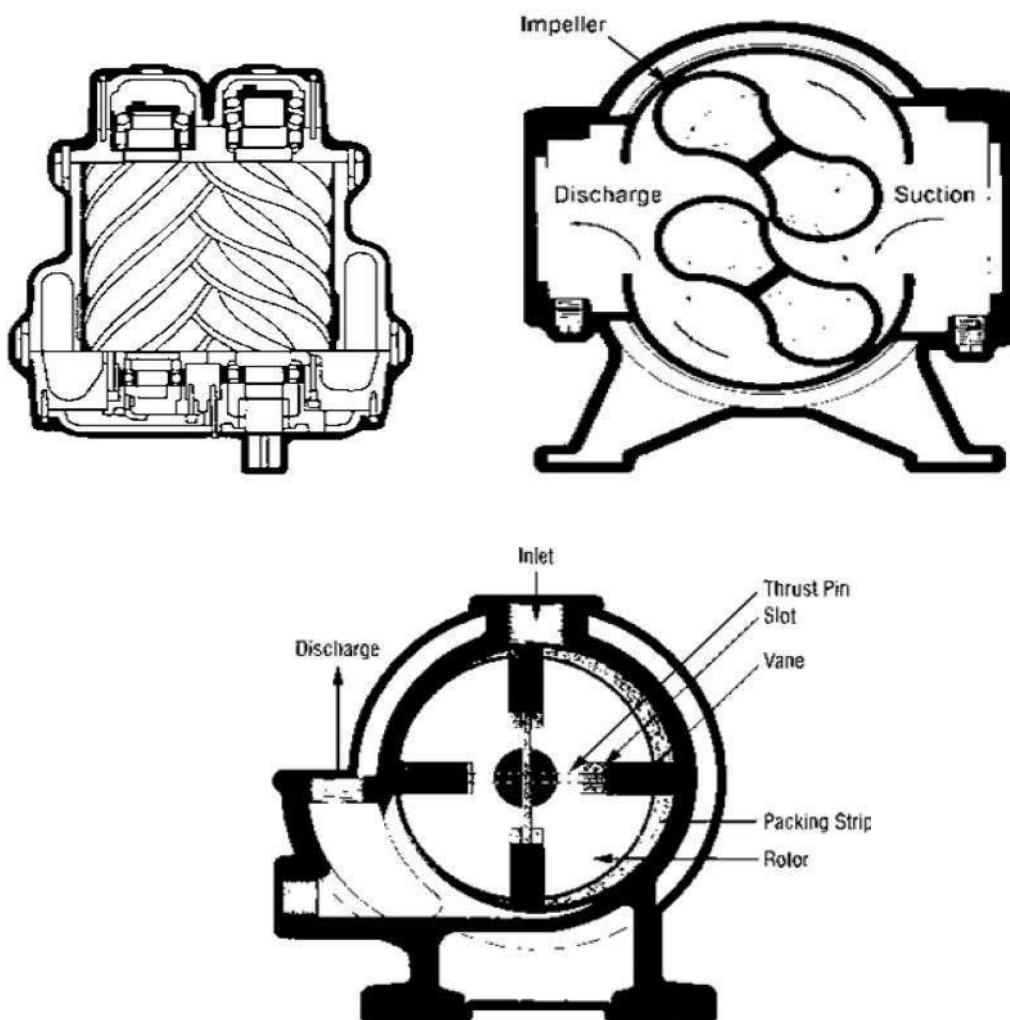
Screw Compressor, Lobe Compressor and Vane Compressor
